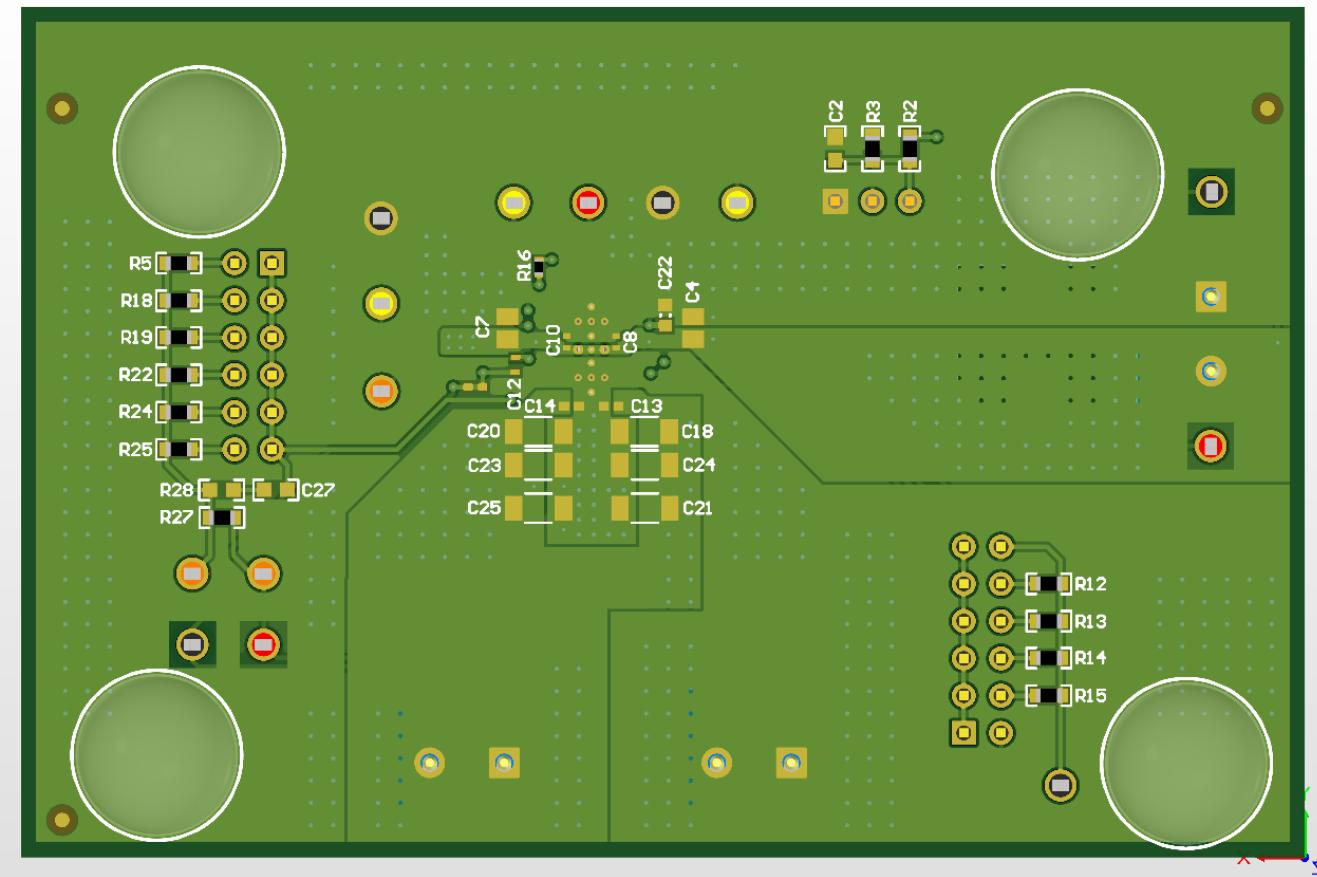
TPSM8A29EVM 3-D Bottom View
